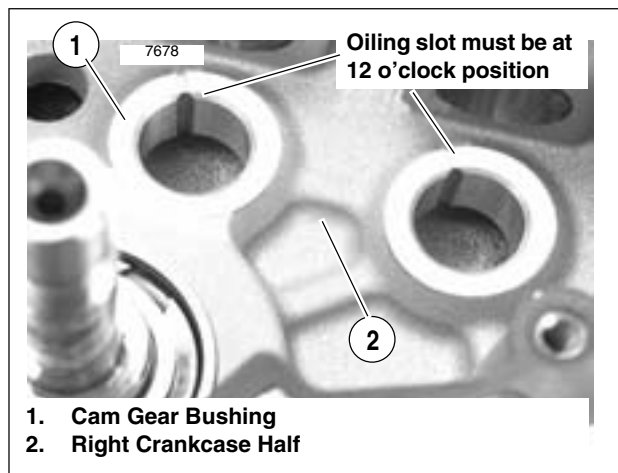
Cam Gear Bushing Installed in Crankcase
